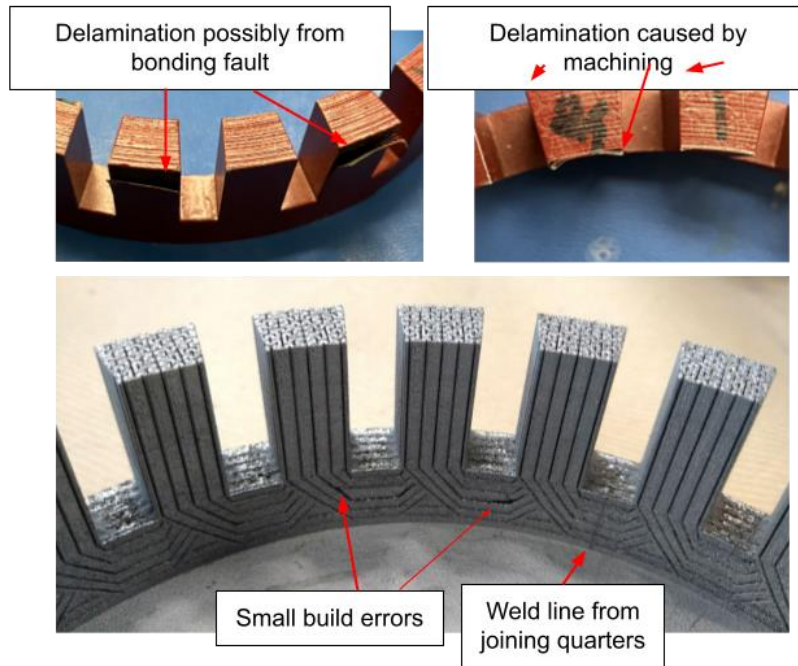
Delamination from bonding and machining shown for the 0.127 mm laminated stator, and build defects of the AM Hilbert stator showing a weld line from splitting the component into four segments, and small errors where the geometry is not exactly as intended.
